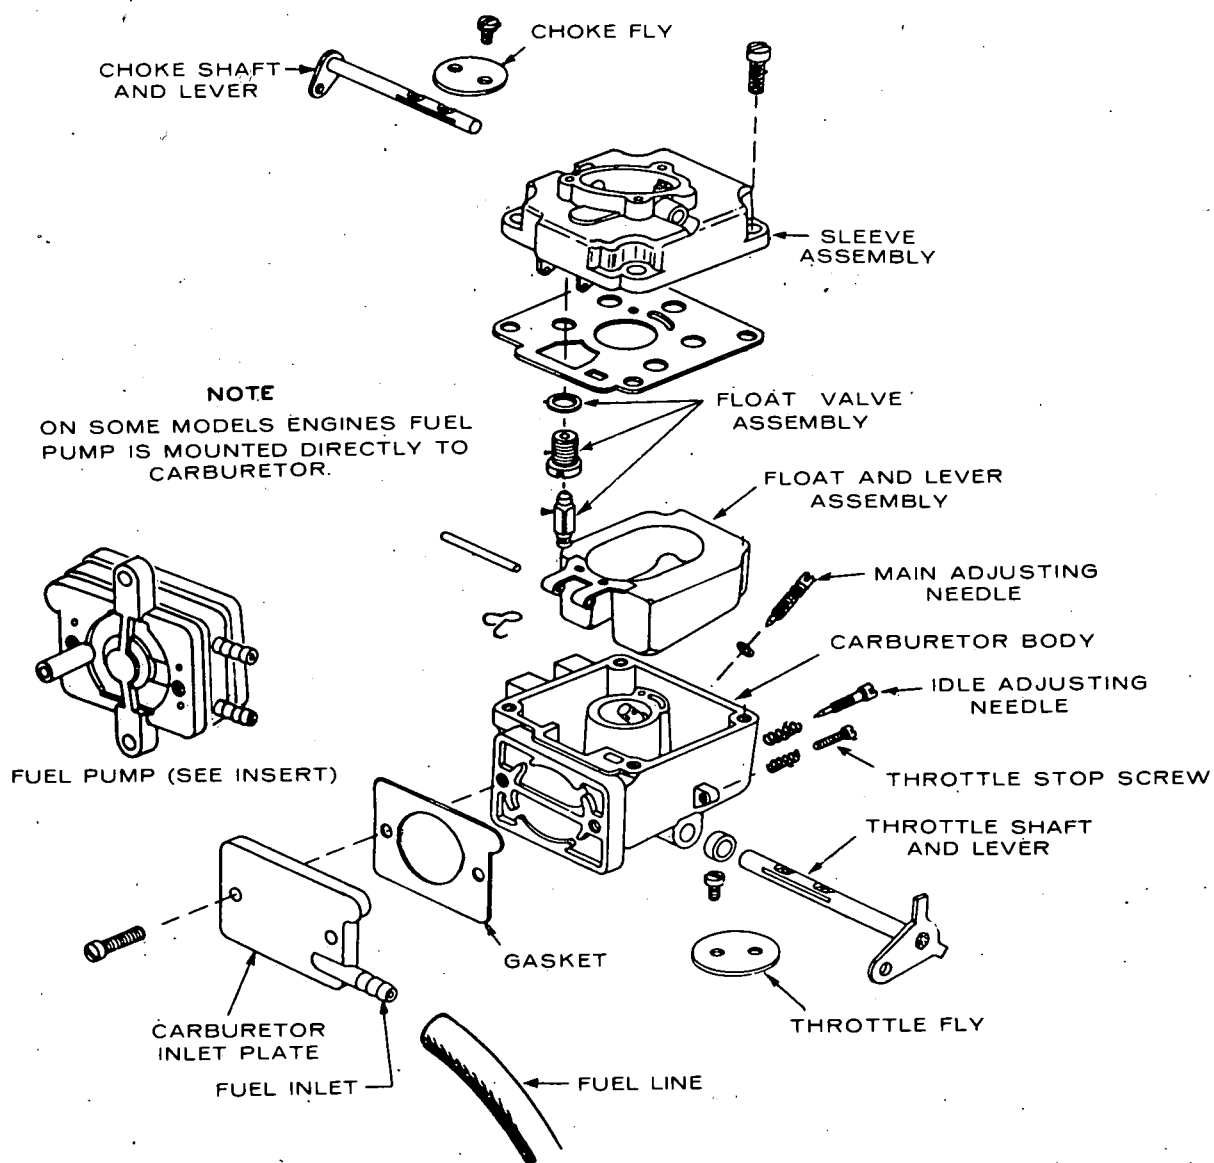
EXPLODED VIEW OF CARBURETOR
